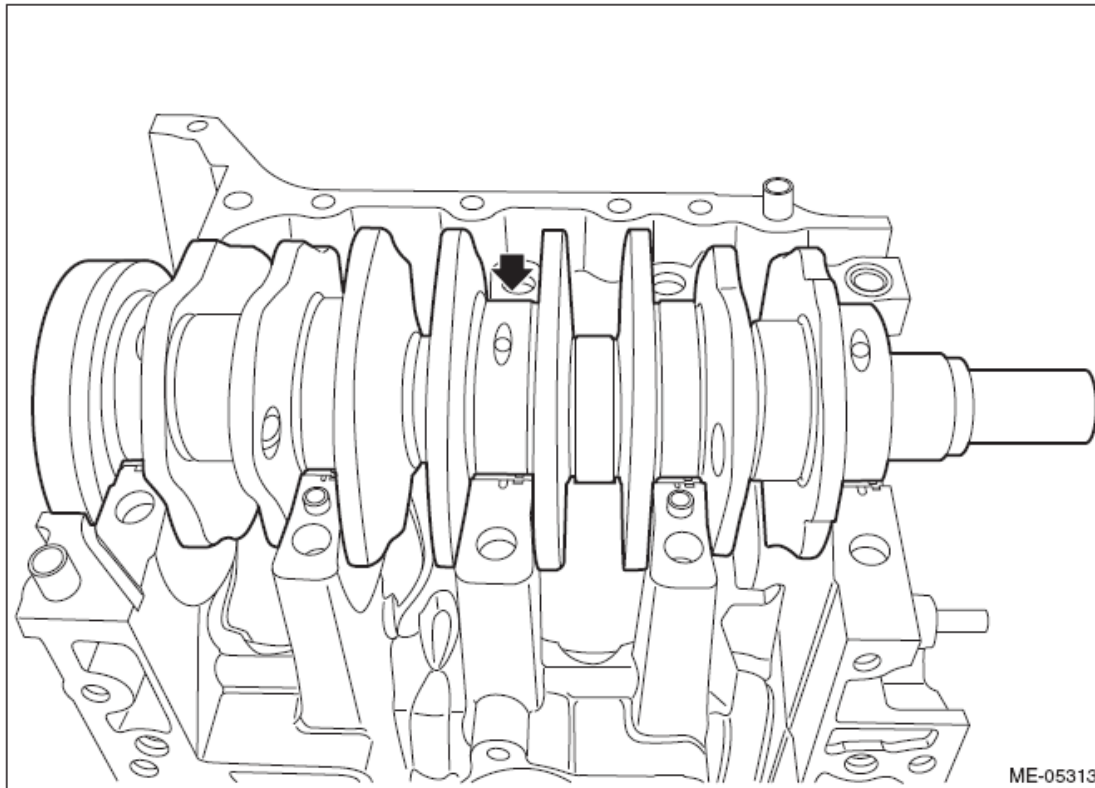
Locating Crankshaft Journal Engine Oil Applying Area
